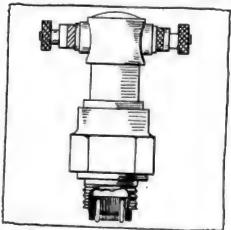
SUPERIOR DOUBLE-POINT PLUG
